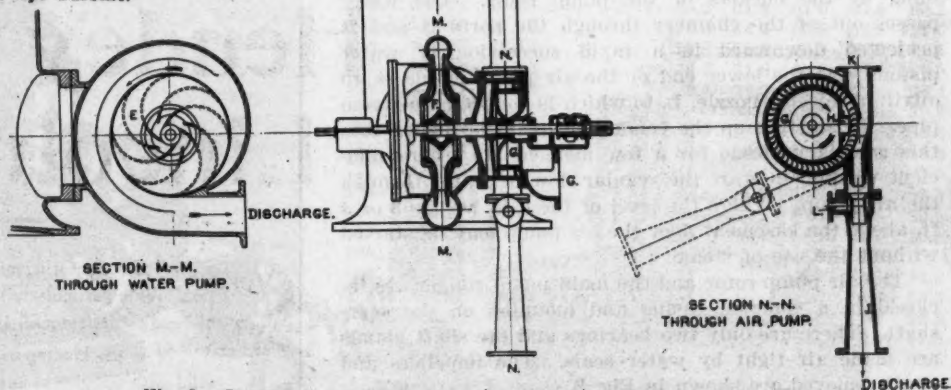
Details of the Condensing Chamber and Water and Air Pumps.
